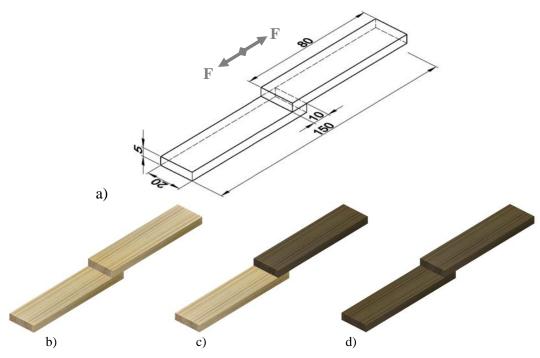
The single-lap joint shear – laminated spruce specimens used in the experiment.
